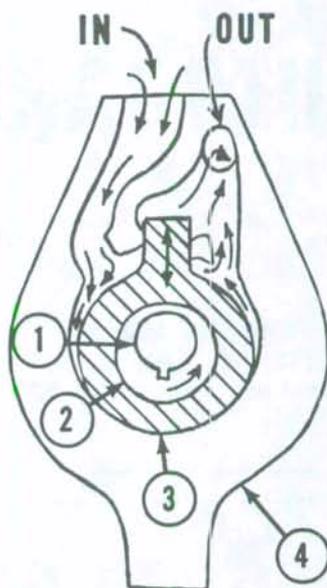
Schematic view of rubber rotor type water pump showing method of operation. Rotor (3) oscillates in housing (4) due to shape of cam (2) on propeller shaft (1).
